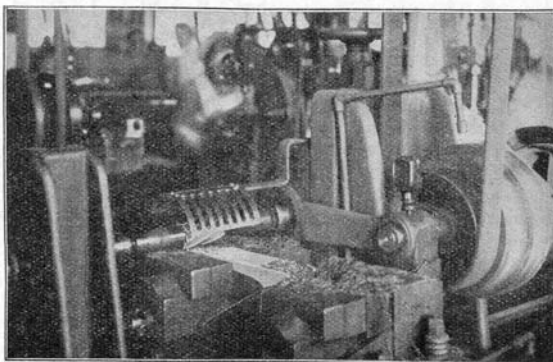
SOLE BEING TRUED ON MILLING MACHINE
